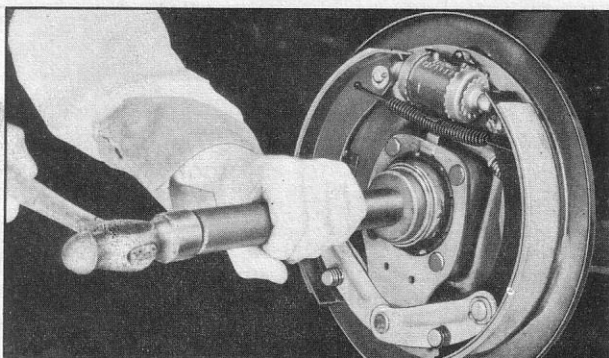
Installing Axle Shaft Bearing and Oil Seal
